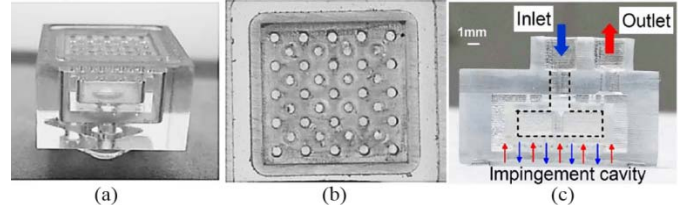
Demonstration of the 3-D printed cooler. (a) Photograph of the 3-D printed cooler. (b) Bottom view of the nozzle plate with inlet/outlet nozzles. (c) Detail of the channels in cross section of the cooler.
